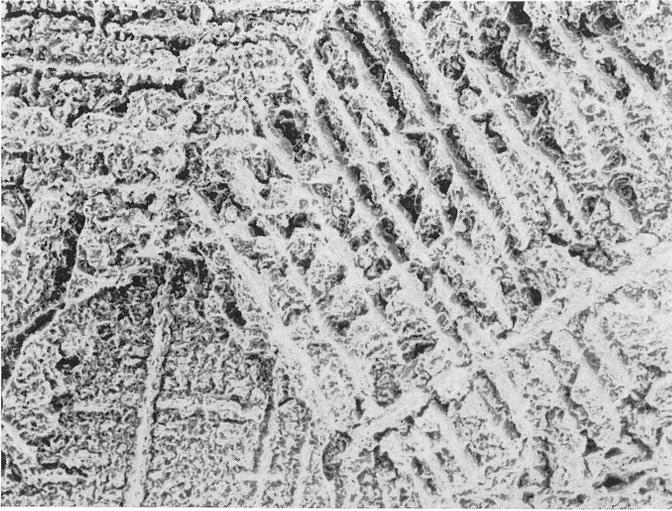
SEM micrograph of a clasp assembly fracture surface.
